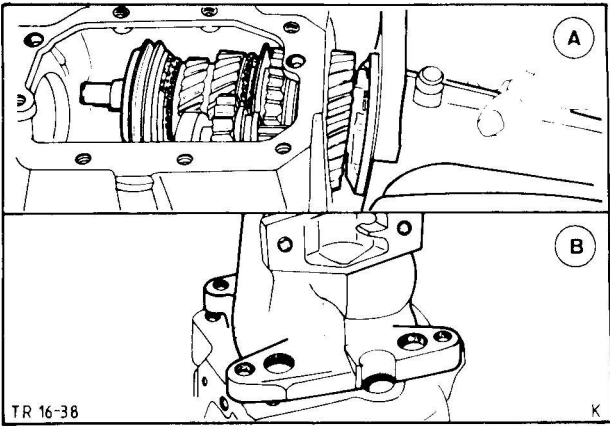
A/B – Fit extension housing and then turn so that hole for countershaft is accessible
